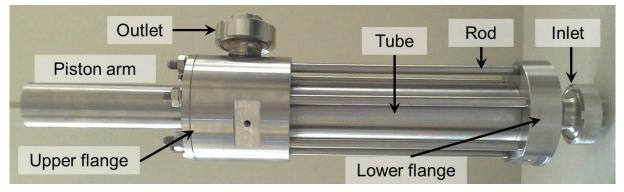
Assembled backpulse unit. The piston head is inside the tube (not visible).
